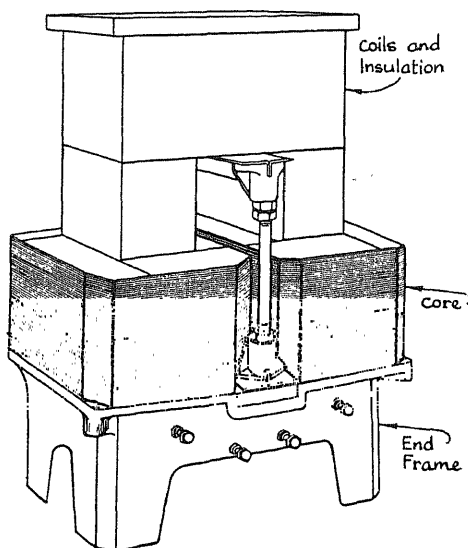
Shell Type Transformer with Magnetic Circuit partially assembled
